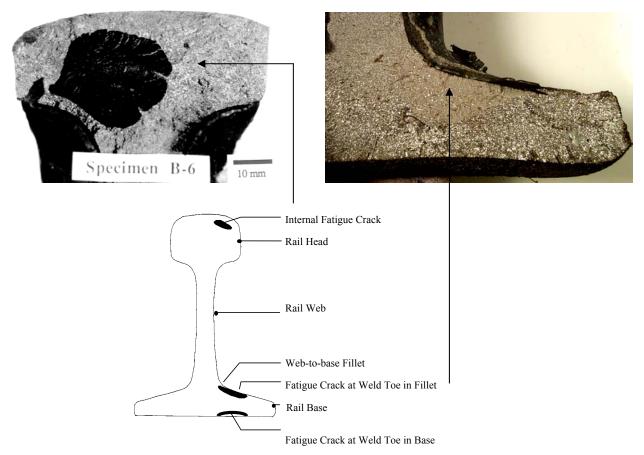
Locations of common sites for fatigue crack initiation in thermite rail welds. (Above, left) Detail fracture initiating at shell defect in rail head. (Above, right) Fatigue failure originating at cold lap located in the web-base fillet. (Below) Locations of common sites in a thermite weld cross-section.
